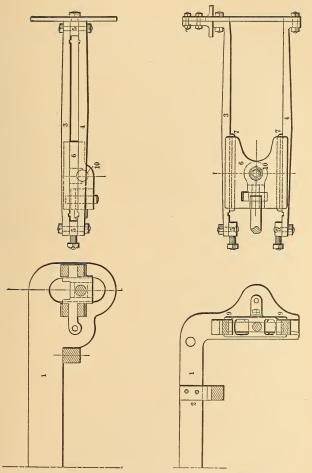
, 68. Guide-bearer, Guides and Crossheads.
